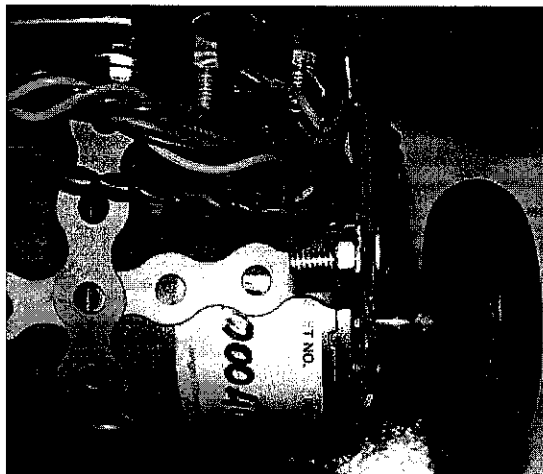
MOTOR-WHEEL CONNECTION USING RIM COUPLING
